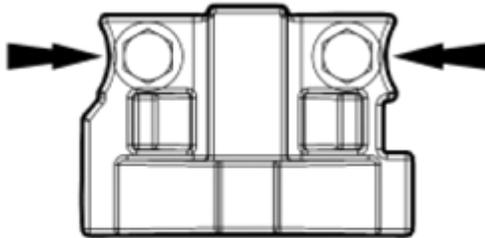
Locating Camshaft Front Thrust Bearing Cap Oil Metering Groove
